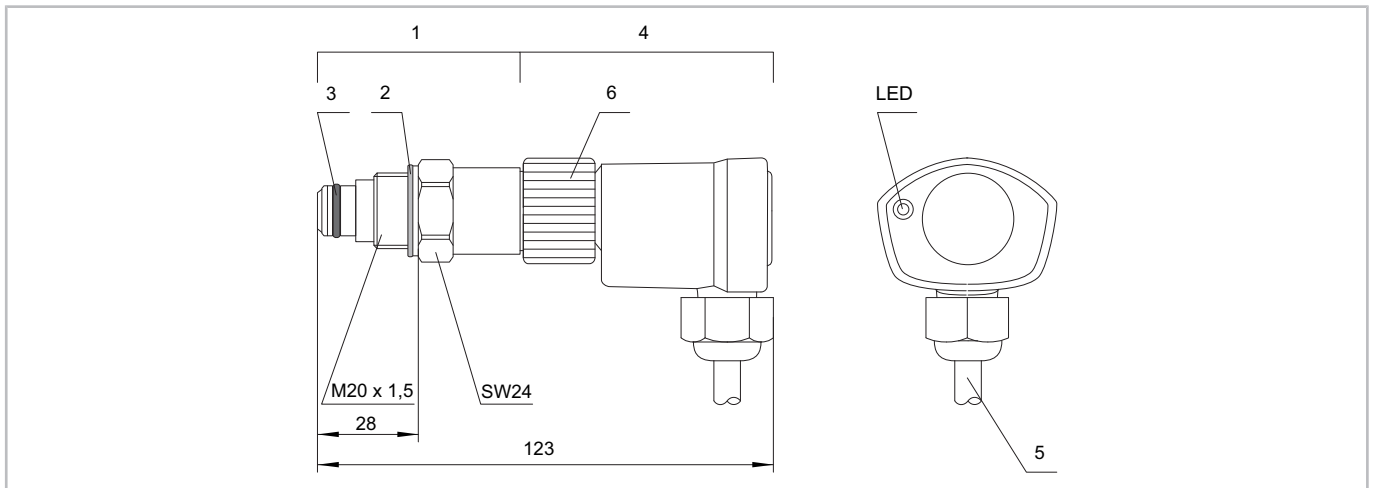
Differential oil pressure switch Delta-PII, dimensions in mm.
